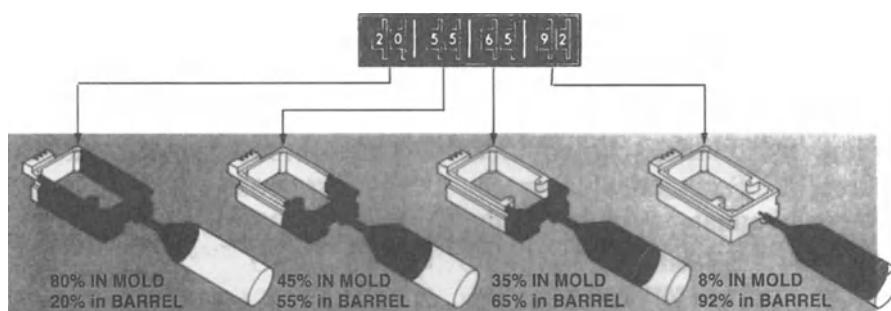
Mold filling speed is adjusted using a process controller.
